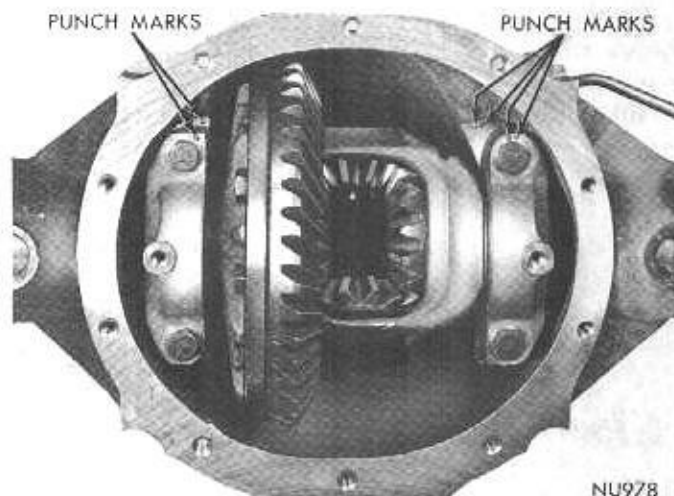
Marking Bearing Caps and Housing for proper Identification
